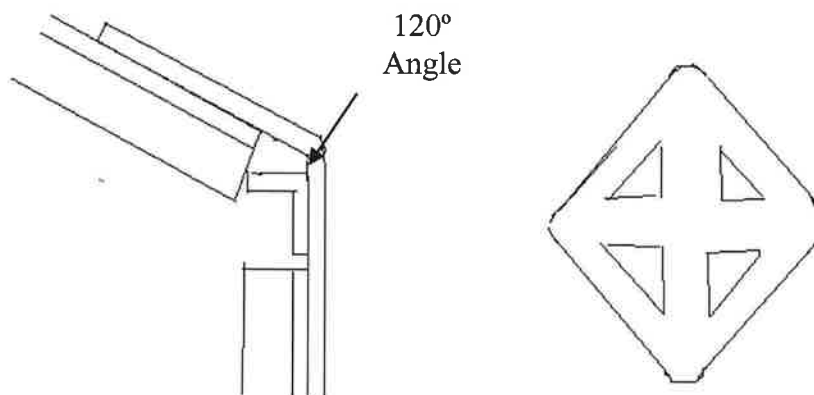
Elevation and Plan Views of  $120^\circ$  Plate Design
